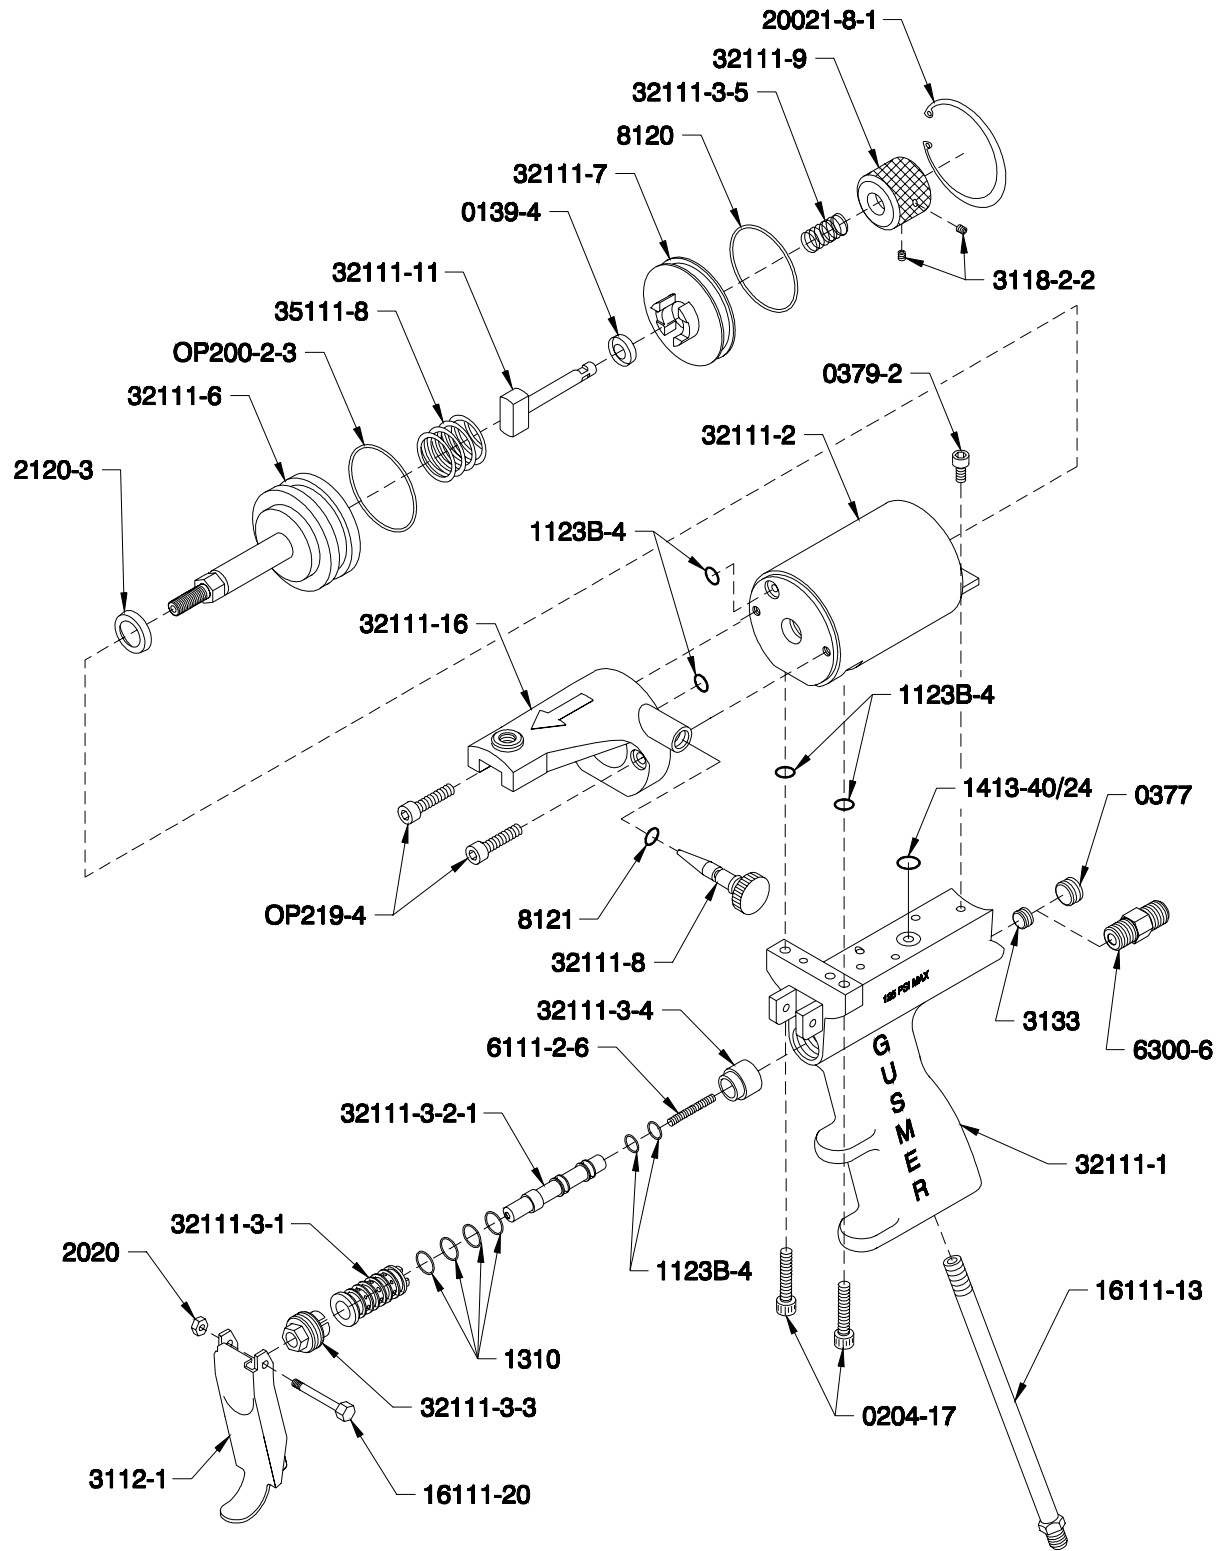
Handle Assembly (Part No. 32111), Exploded View
